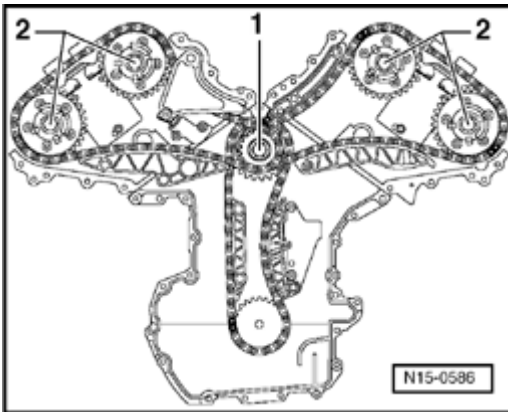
Identifying Securing Bolt For Intermediate Shaft Chain Sprocket & Camshaft Timing Adjusters
